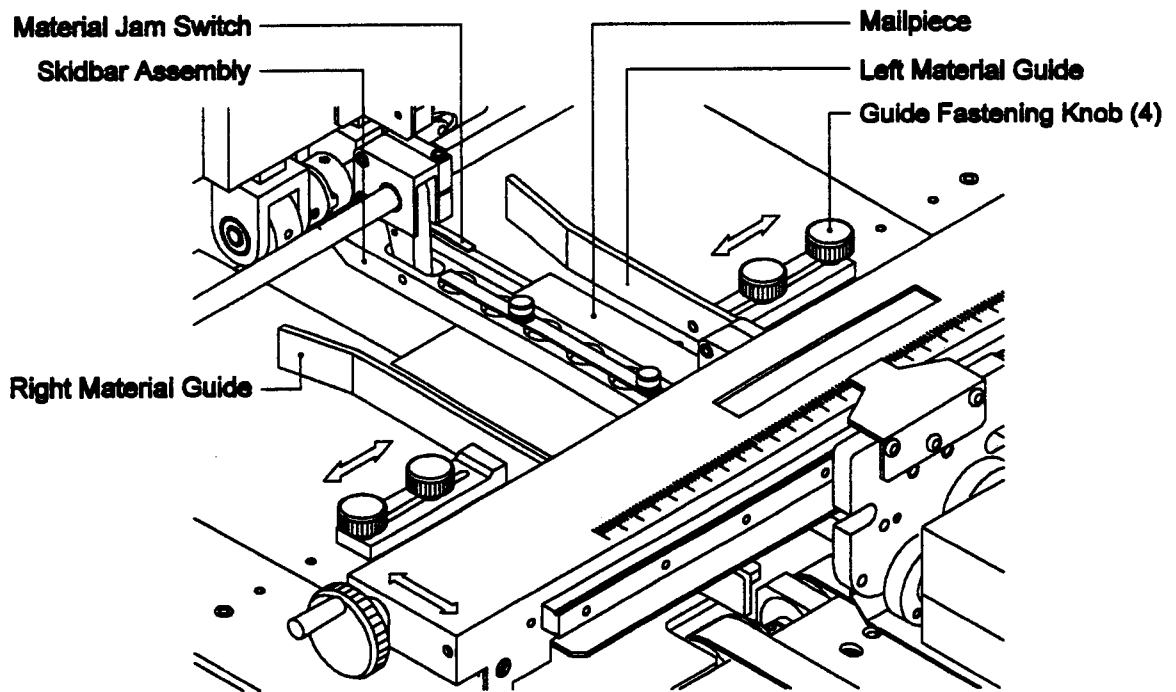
Outfeed section of the feed rollers illustrating the material side guides and the skidbar.
